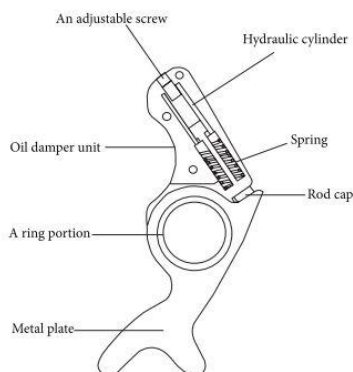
Articulated AFO design incorporating a hydraulic ankle damper (adapted from [52]).
